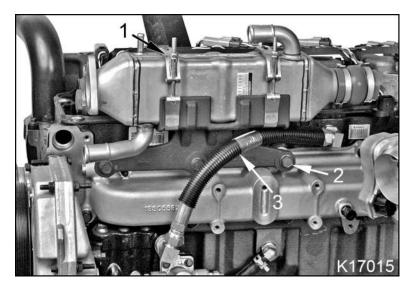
Intake side EGR cooler assembly and high-pressure oil hose
